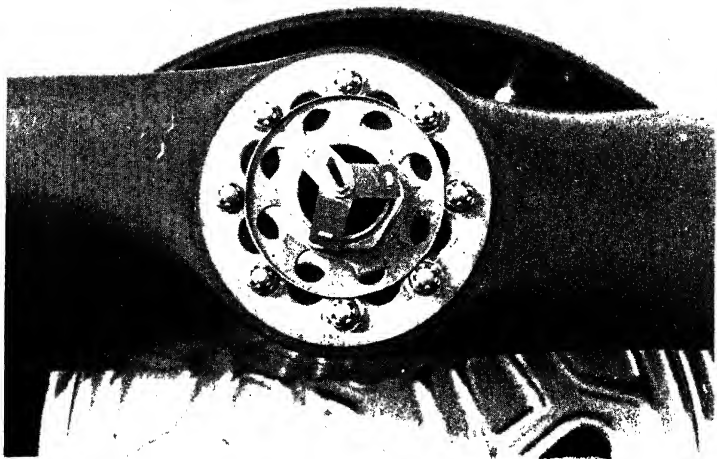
HUB BOLTS ON SMALL INSTALLATIONS MAY BE LOCKED BY MEANS OF A LOCKING PLATE, IN THIS WAY.
